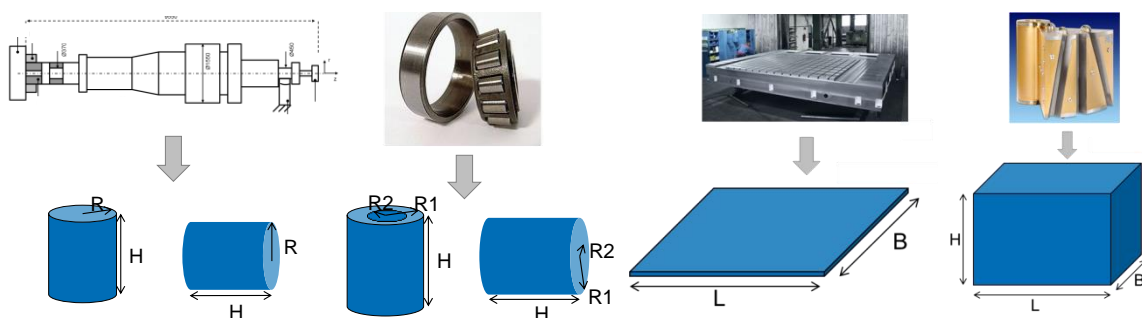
Simplified geometries of a turbine rotor, a rolling bearing, a machine bed and a gear standard
